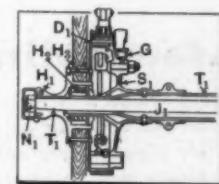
Section of the live rear axle through the hub of one of the wheels, showing a jackshaft of changing diameter without flanges or other abrupt contours
